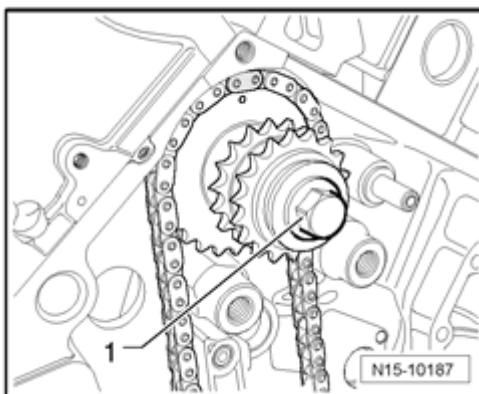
Hand-Tightening New Securing Bolt Of Intermediate Shaft With "Left Thread"
